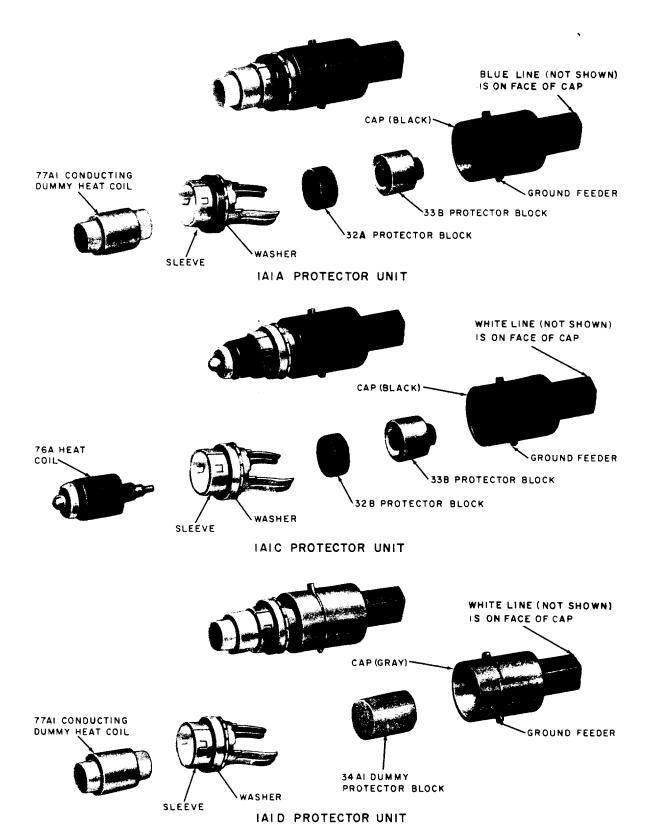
A1A, 1A1C, 1A1D Protector Unit Assemblies
